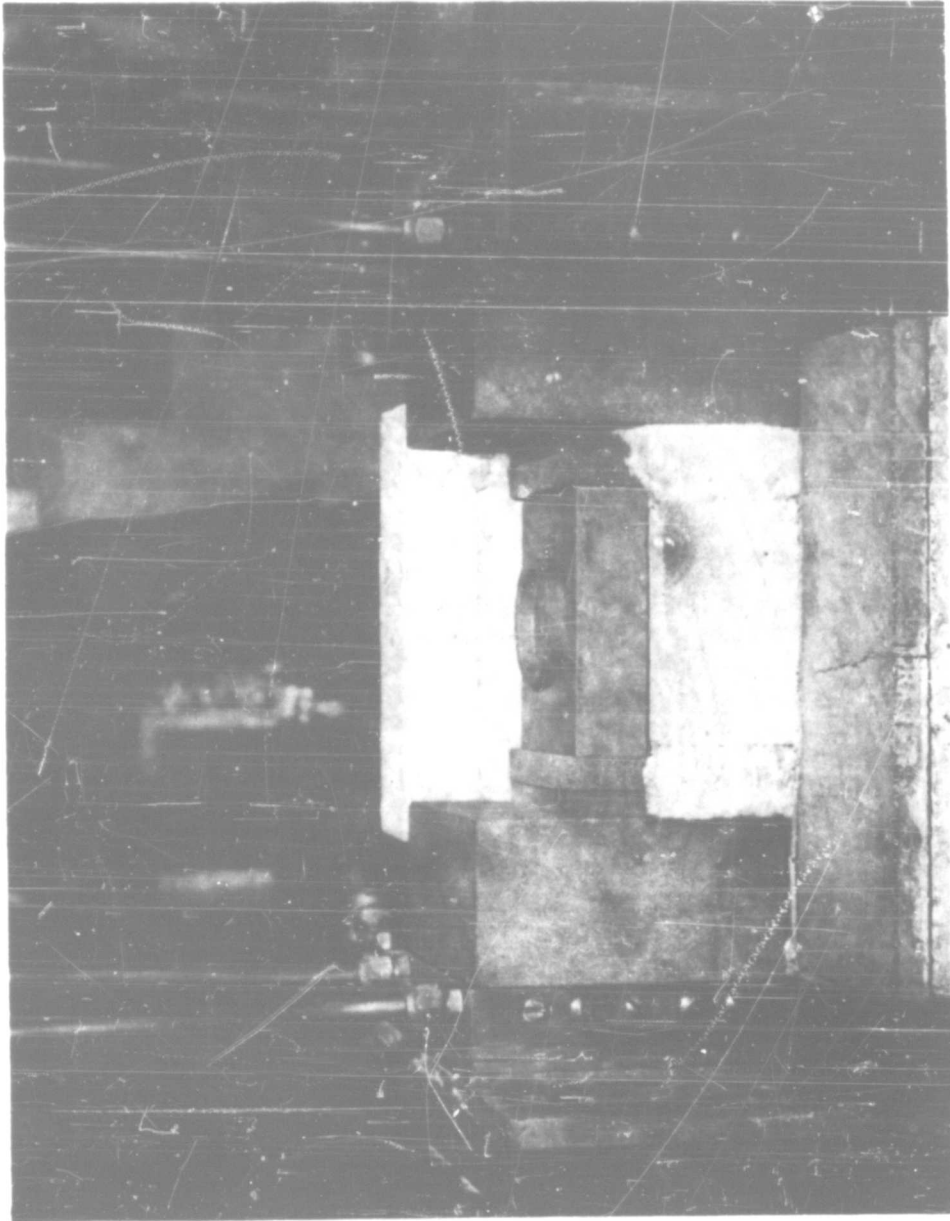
Resistance Hot Press Showing Interior with Mold Exposed
